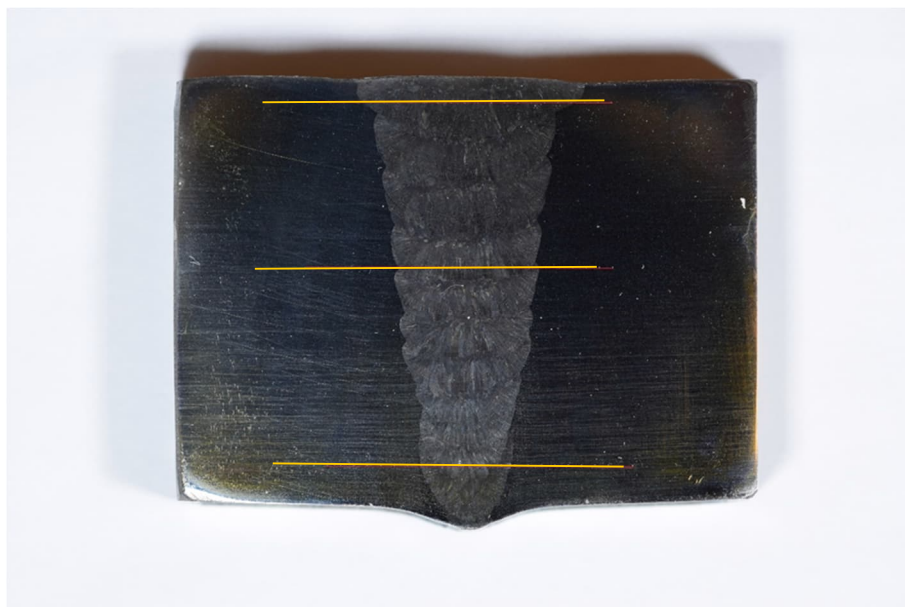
Location of hardness measurement lines in the pipe weld cross-section.
